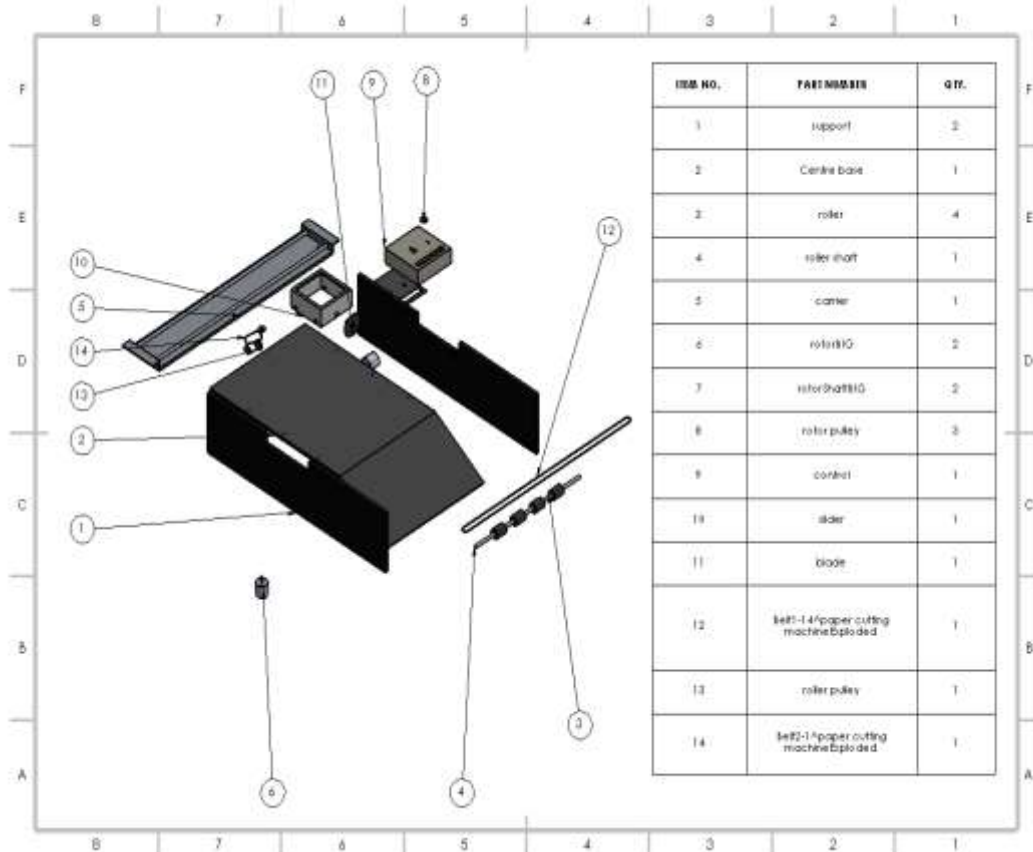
Design of the automatic paper cutting machine (exploded view).
